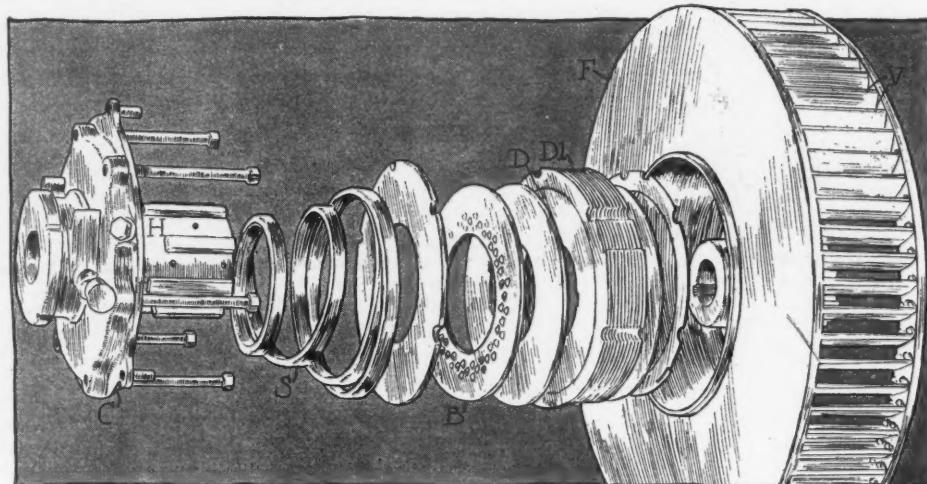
MULTIPLE-DISK CLUTCH AND FLYWHEEL FAN
